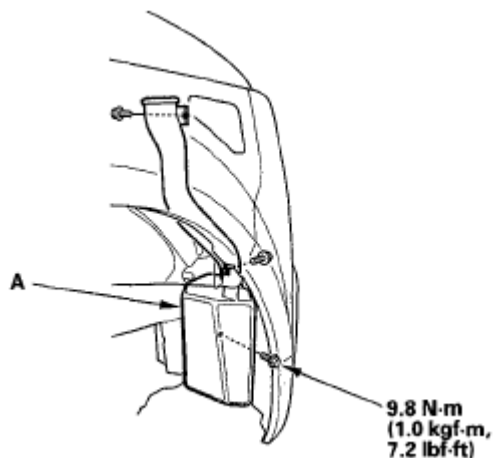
Identifying Mounting Bolts And Washer Reservoir With Torque Specification
